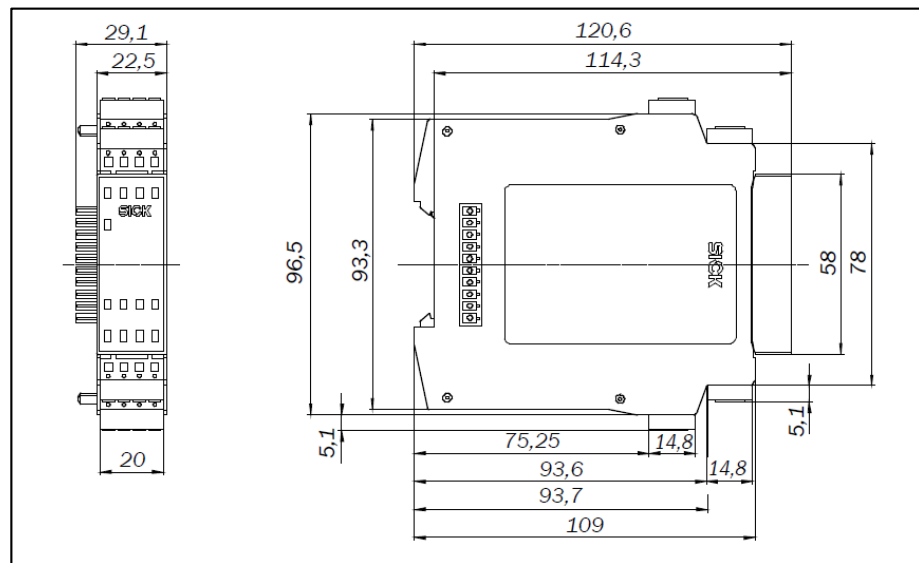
9.2.4 Dimensional drawing of the FX3-XTIO expansion module
